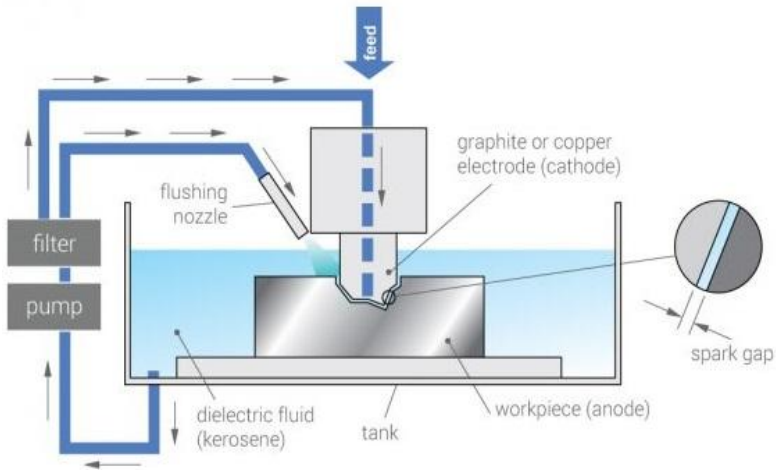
Electrical Discharge Machining (EDM) Diagram.
